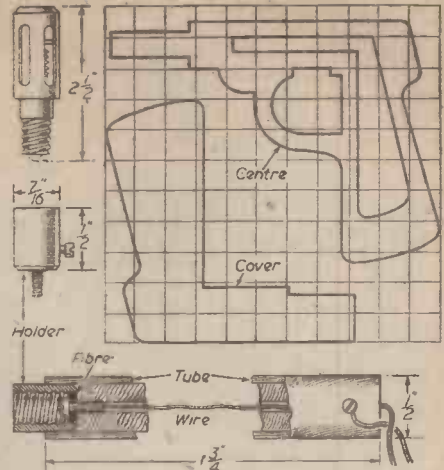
Outline of gun shapes plotted in ½ in. squares, with enlarged details of element, holder and tubing, with broken section.
